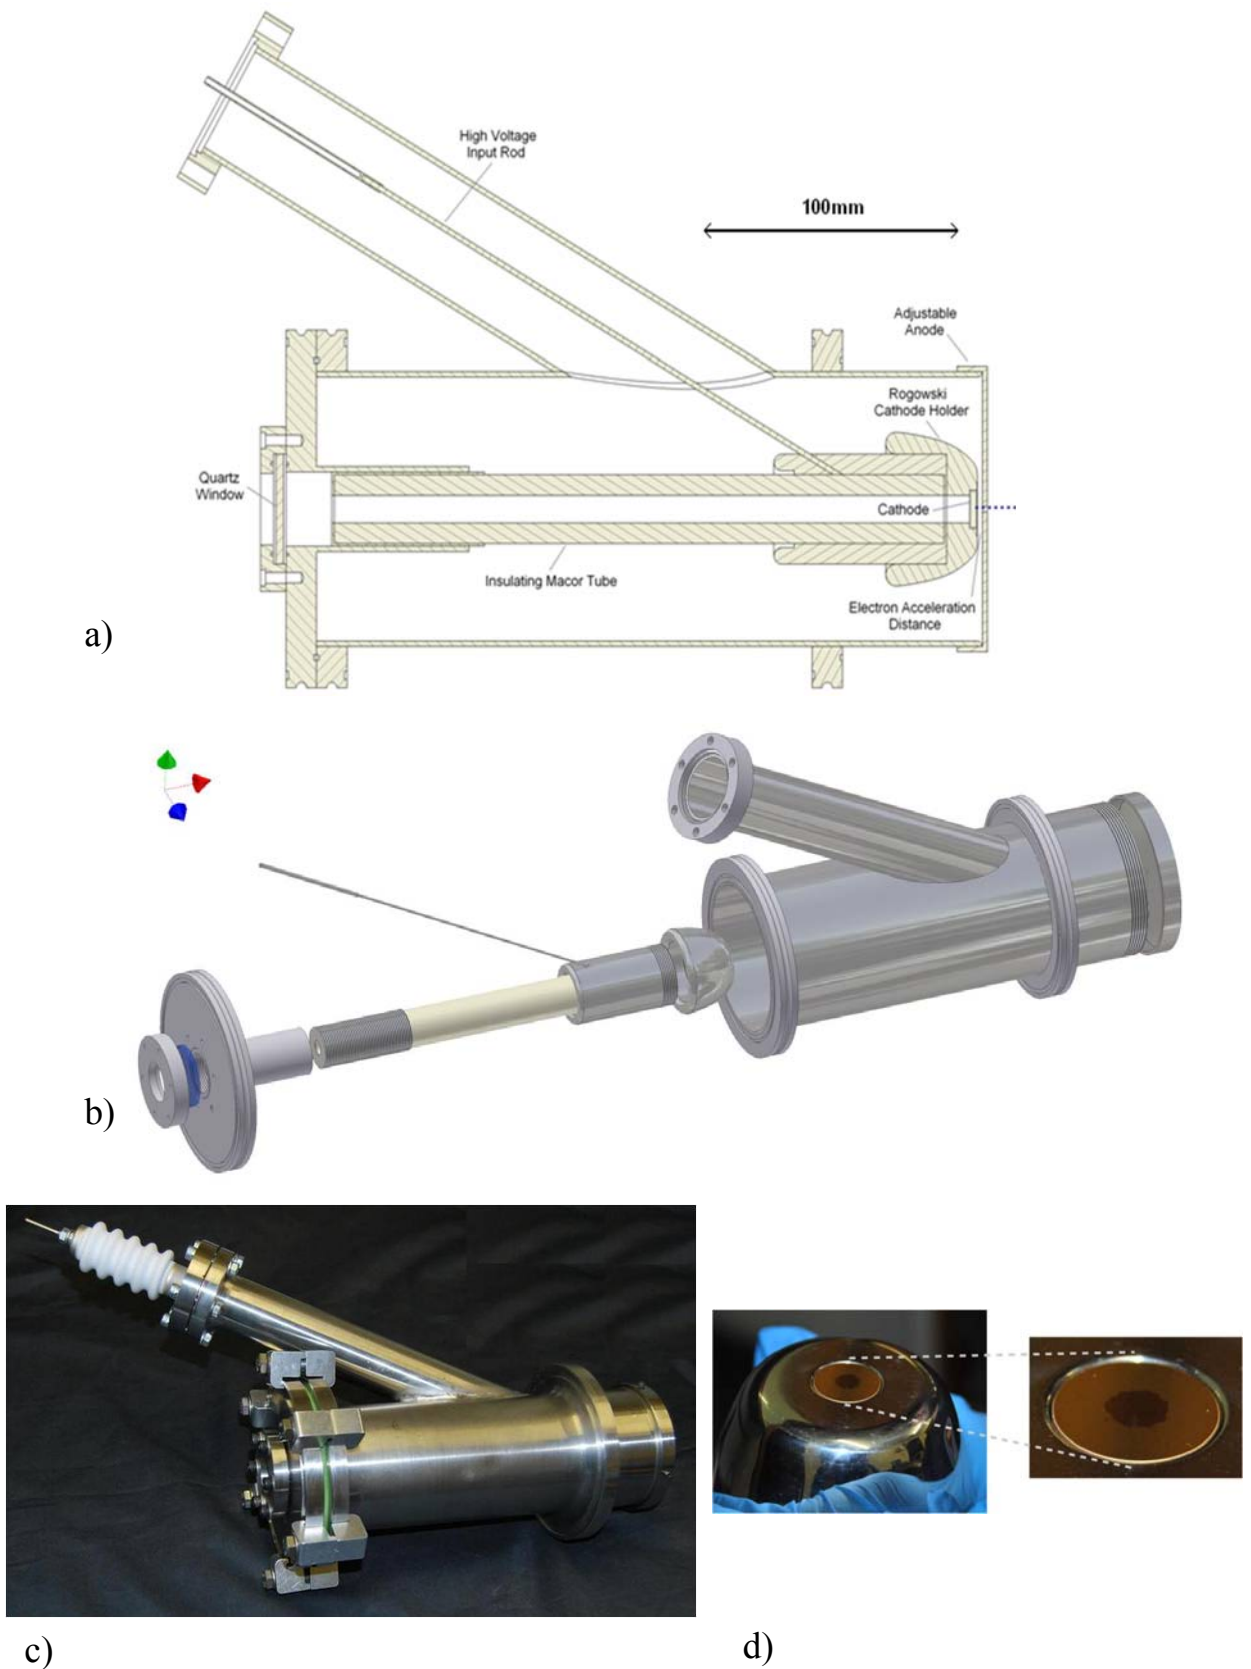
UED gun design. a) schematic cross section, b) exploded 3 dimensional rendition of the gun design, c) finished electron gun and d) close-up of the Rogowski electrode with fitted photocathode.
